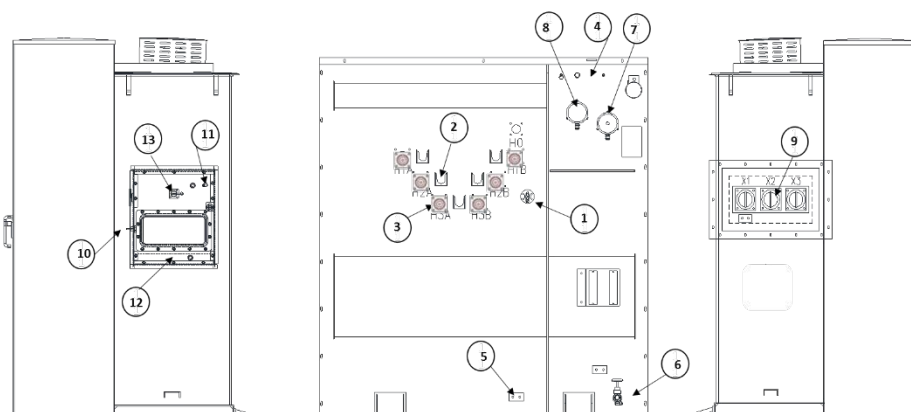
Three-Phase pad-mounted transformer with viewing window : a) Loadbreak switch compartment side, b) HV bushings and NLTC side and c) LV bushing side Gauges and accessories side.
